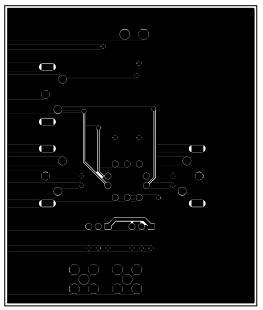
PCB Drawing Layer 2 (Bottom Layer of the EVAL-ADG854EBZ Evaluation Board)
